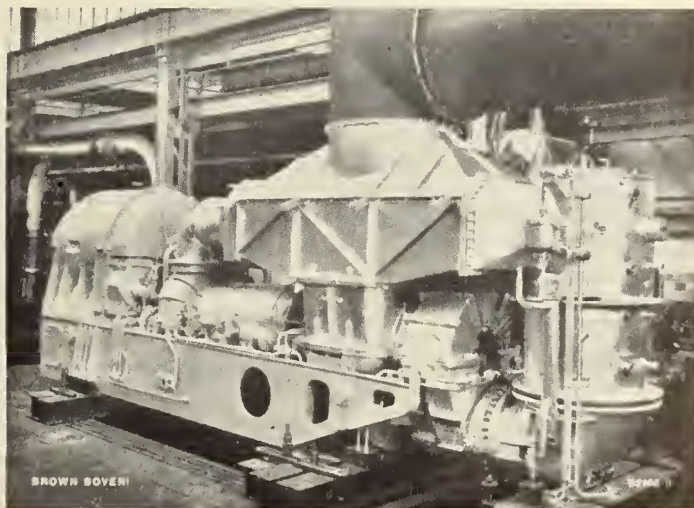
Gas-turbine Generator Set on the test bed. The complete set is mounted on a common frame which also contains reservoirs for fuel oil and lubricating oil.
